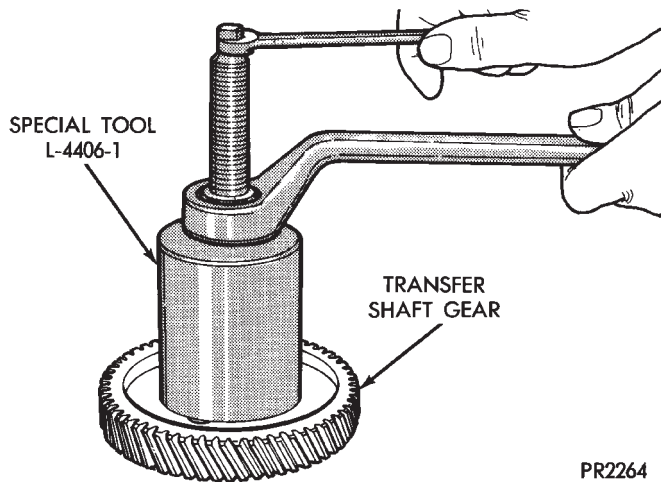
Using Tool L-4406-1 with Adapter L-4406-3, Remove Transfer Shaft Gear Bearing Cone
